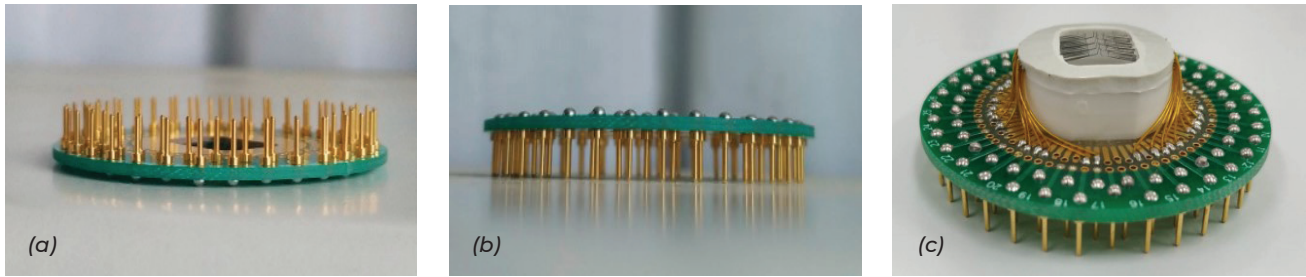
(a) Result after hypertac installation, (b) Final result using the proposed fixture, and (c) Final product
